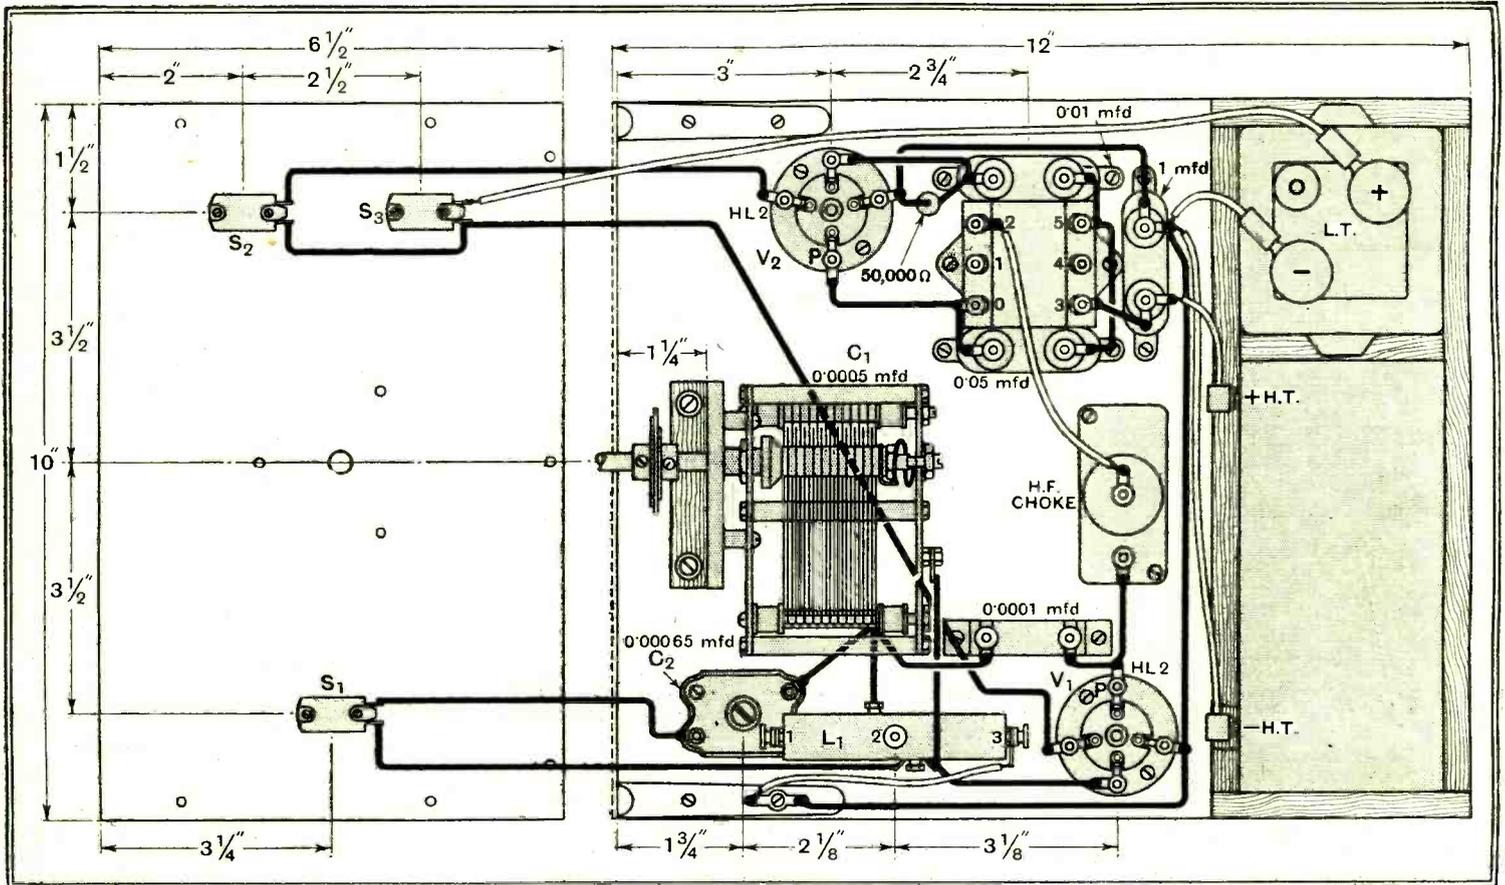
Layout and wiring diagram with principal dimensions. The batteries are held in position by narrow fillets screwed to the baseboard.
